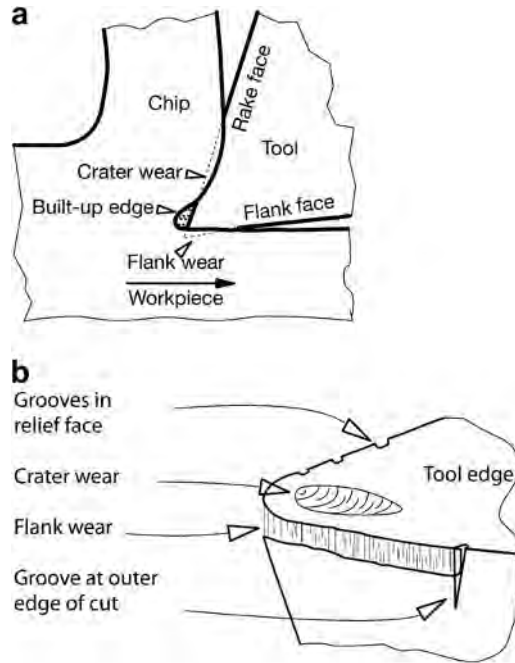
Typical location of wear failure and built-up edge on the tool.
